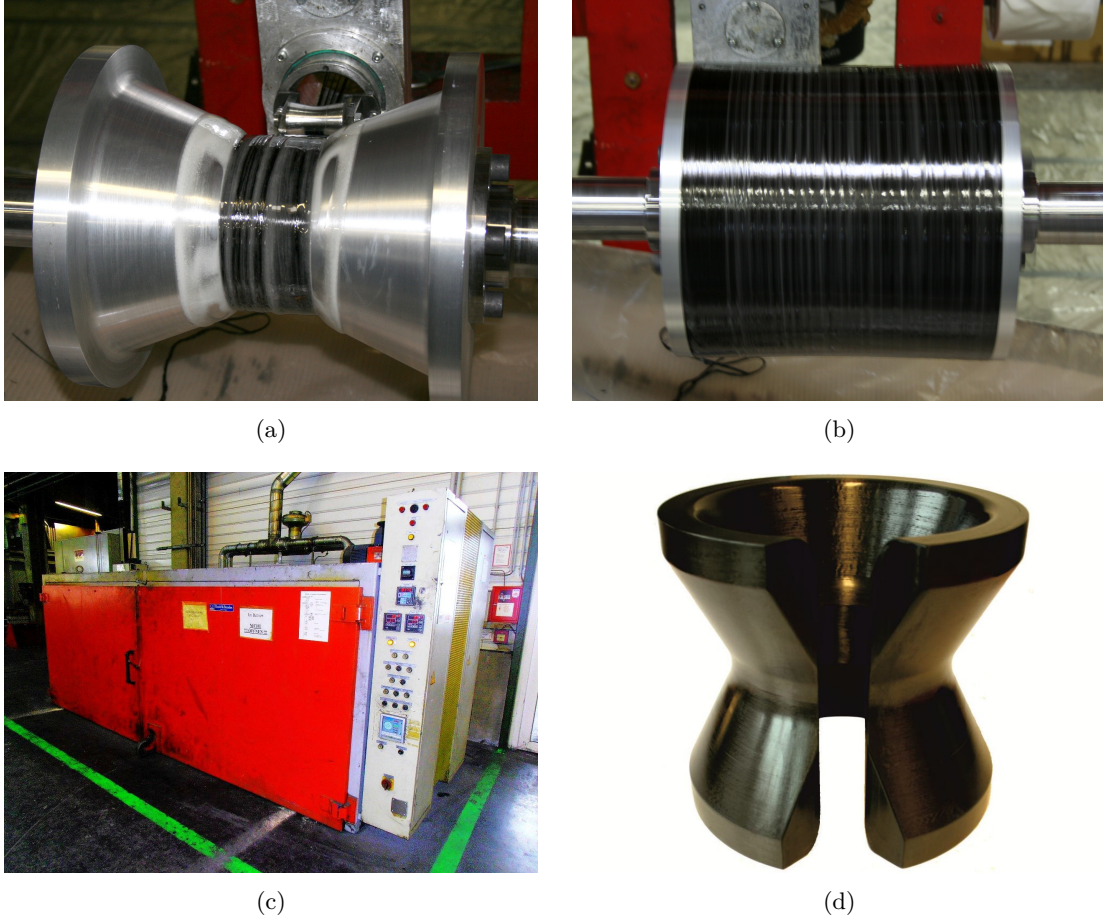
Fabrication of the test specimen: (a) aluminium mandrel; (b) finished winding operation; (c) temperature-controlled oven; (d) turned and milled specimen.
